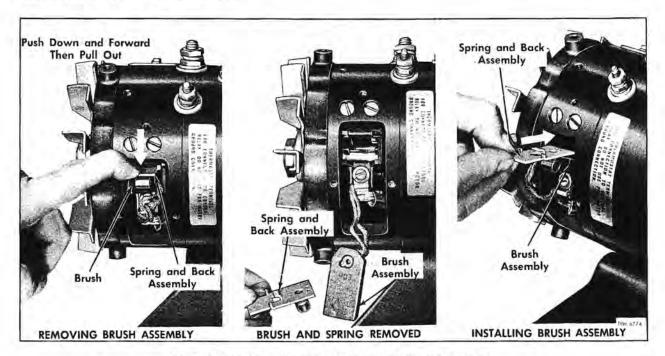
Replacing Standard Underfloor Blower Motor Brushes
